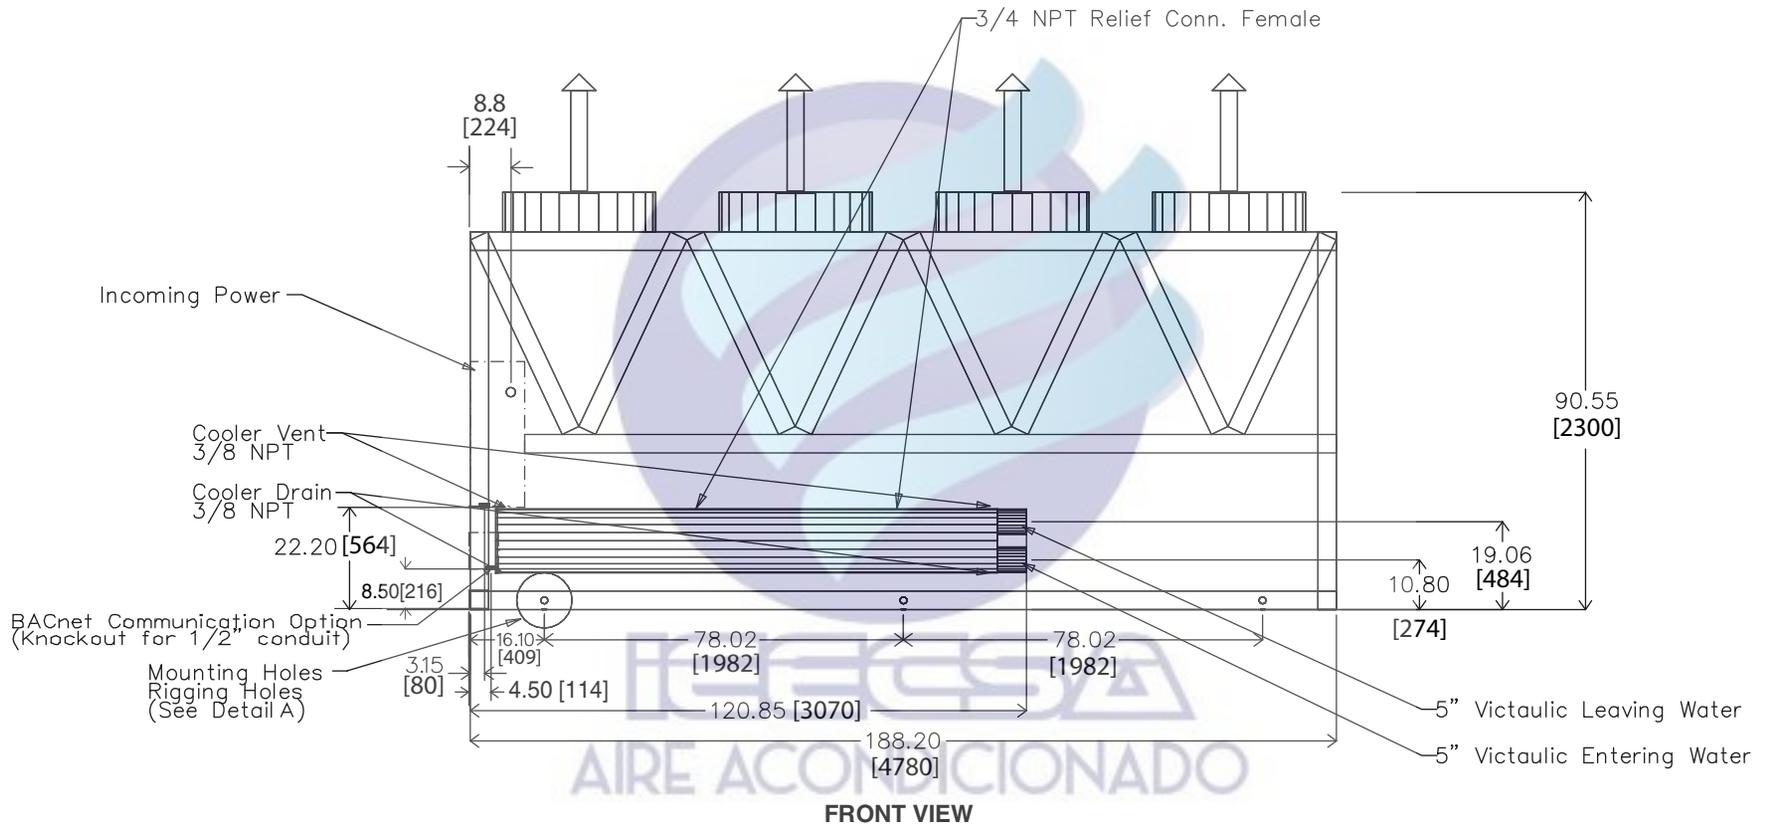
30XA090, 100, 110, 120 Air-Cooled Liquid Chiller Dimensions without Pump (cont)
